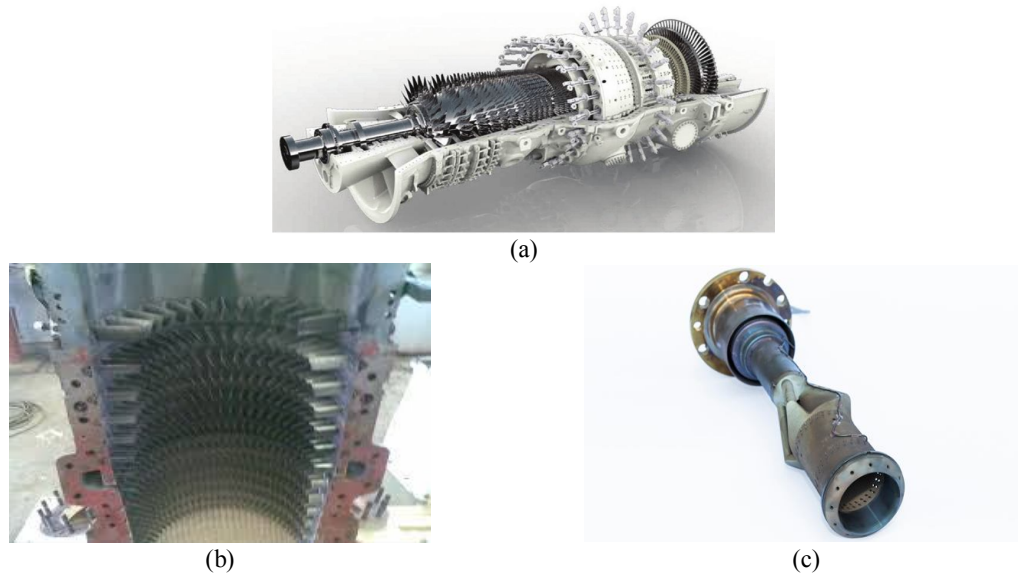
(a) Gas turbine, (b) Turbine Stator blades & (c) burner
